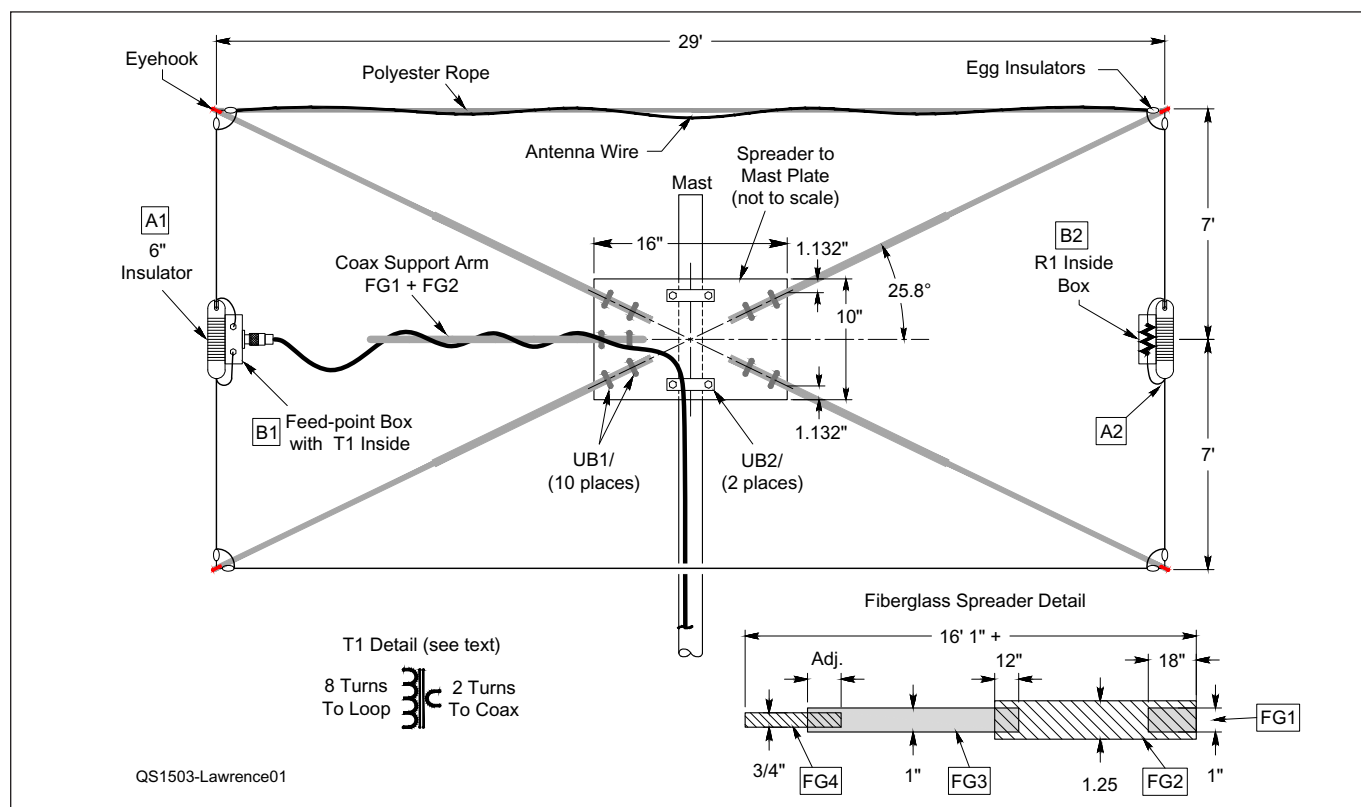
shows the mechanical details of the antenna. I used a ¼-inch thick × 16 × 10-inch 6061-T6 aluminum plate to attach the element spreaders to the mast. For the U-bolt and saddle mounting holes, I scribed two lines through the center of the plate, parallel to each side. I then scribed two more lines through the center of the plate — one to the left and another to the
